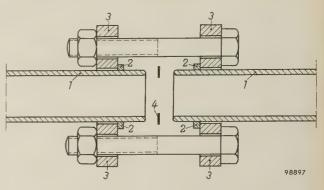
Vacuum-tight joint directly between small tubes. The tubes 1 to be connected have their edges rounded off; 2 flanges welded on to tubes; 3 loose rings holed to take tiebolts; 4 copper packing ring.
